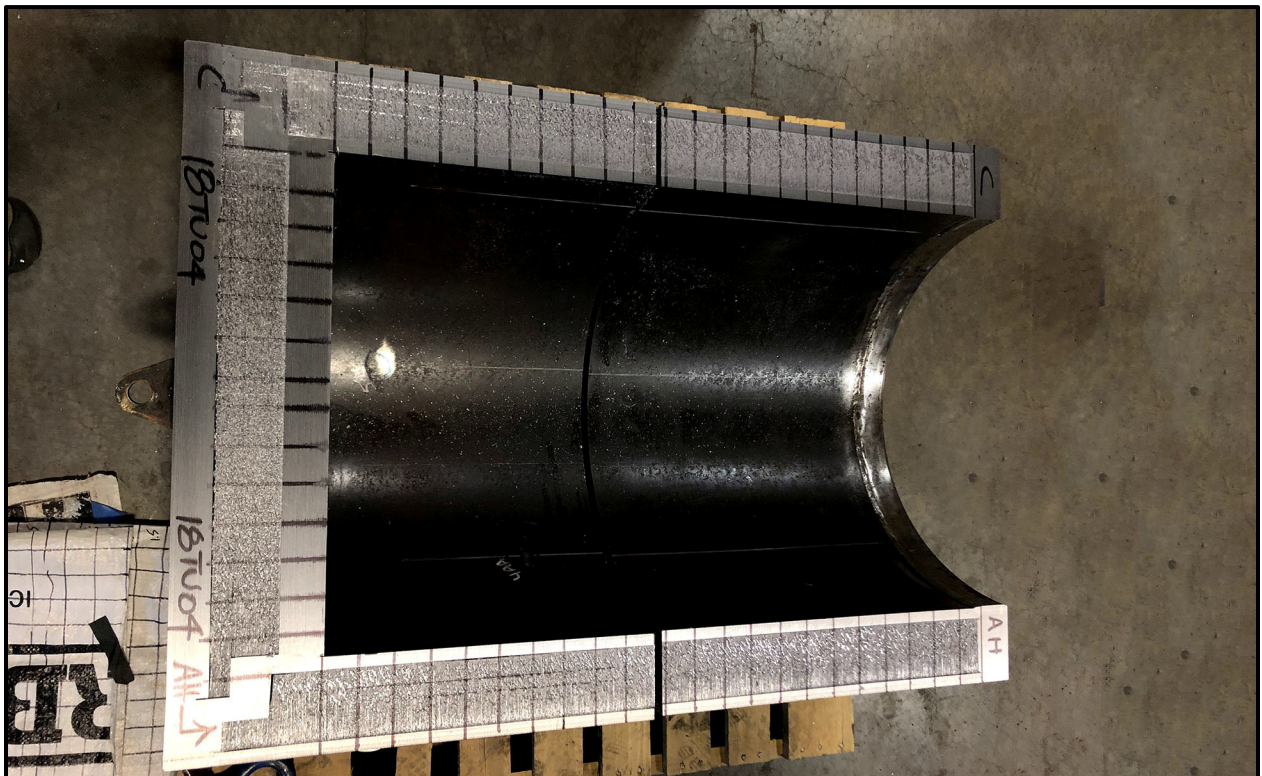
SC-30G3 18TU-04 Destructive Disassembly Overview
